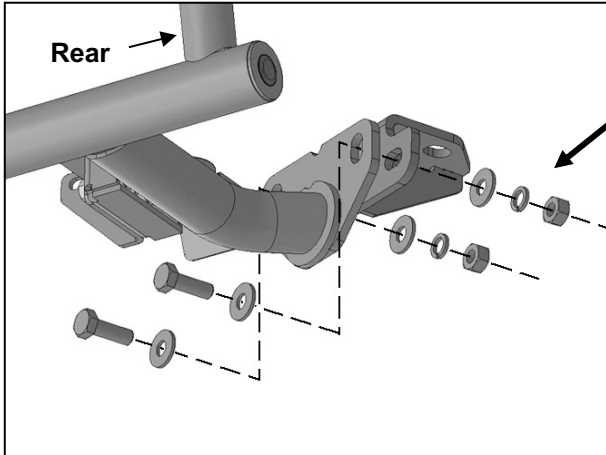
Attach front of Rocker Slider to front Frame Mounting Bracket
